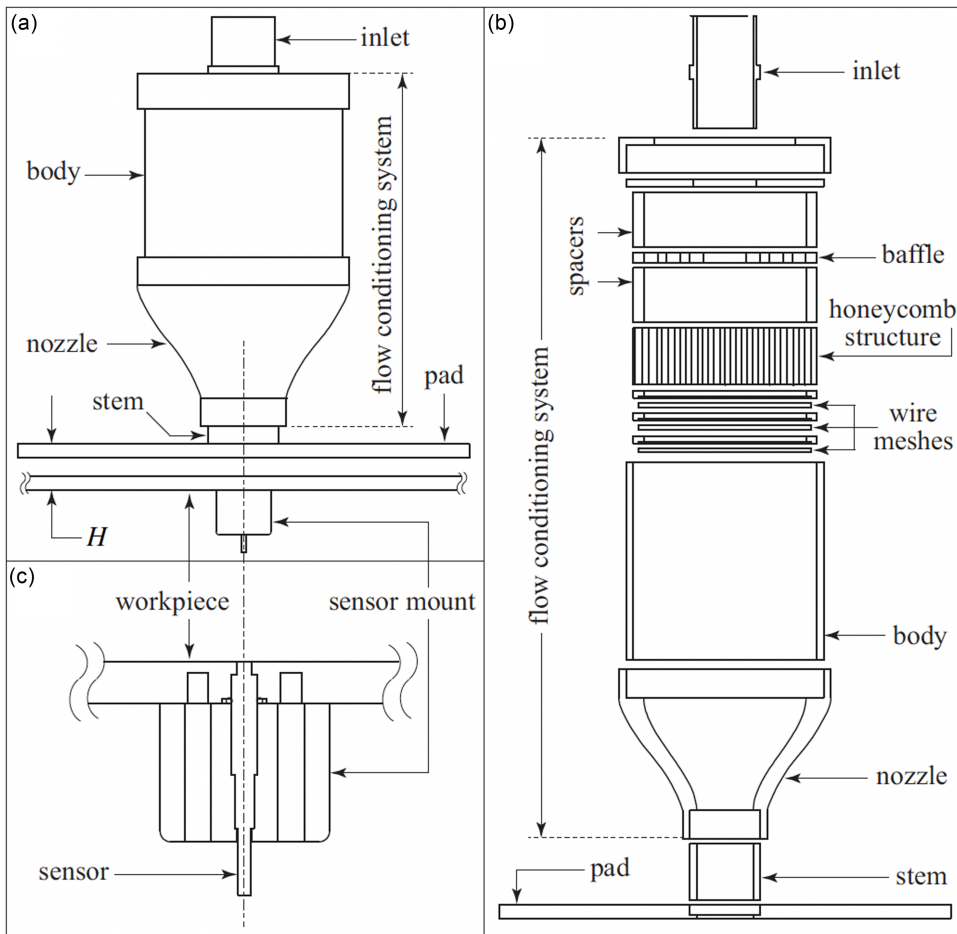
(a) Bernoulli-pad assembly shown in its nominal configuration over the workpiece, (b) exploded view of Bernoulli-pad assembly, (c) sectional view of flush-mounted sensor in workpiece.
